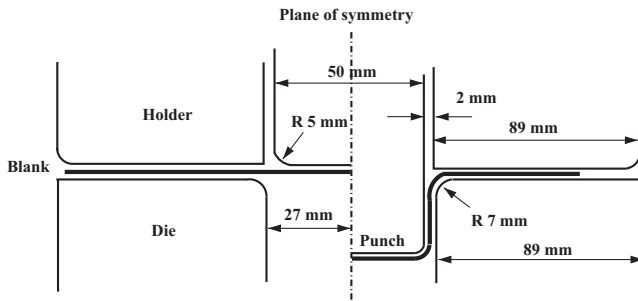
A schematic view of tools and dimensions for U-draw/bending test.
